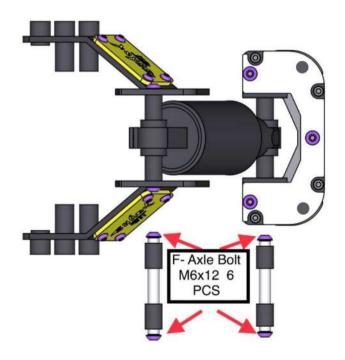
Shock Absorber to Swing Arm Top View (Axle Bolts)
